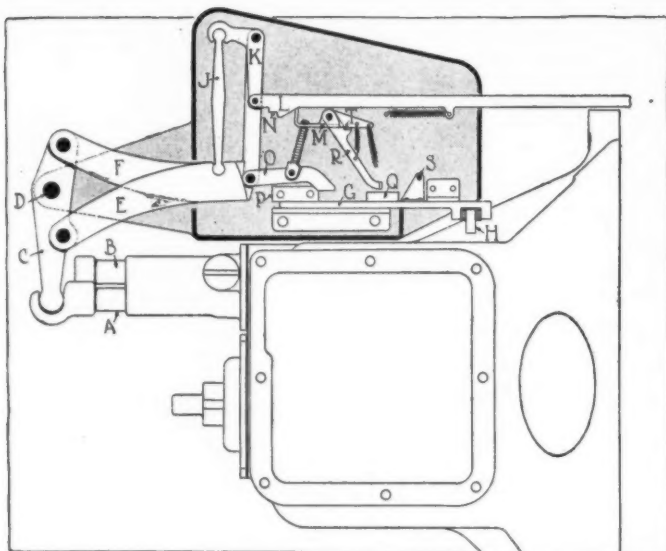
Grand Rapids pedal gearshifter. The letters A, B, C, D, E, F, G, and H represent the parts used in engaging the gears, while the selector mechanism is indicated by the letters J, K, L, and M. The gear previously meshed is brought to neutral by the members O, P, Q, and G. The letters from L to T, inclusive, show the parts that are used in releasing the selector button
